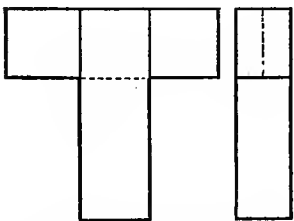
Mechanical Drawing of Half Lap Tee Joint
